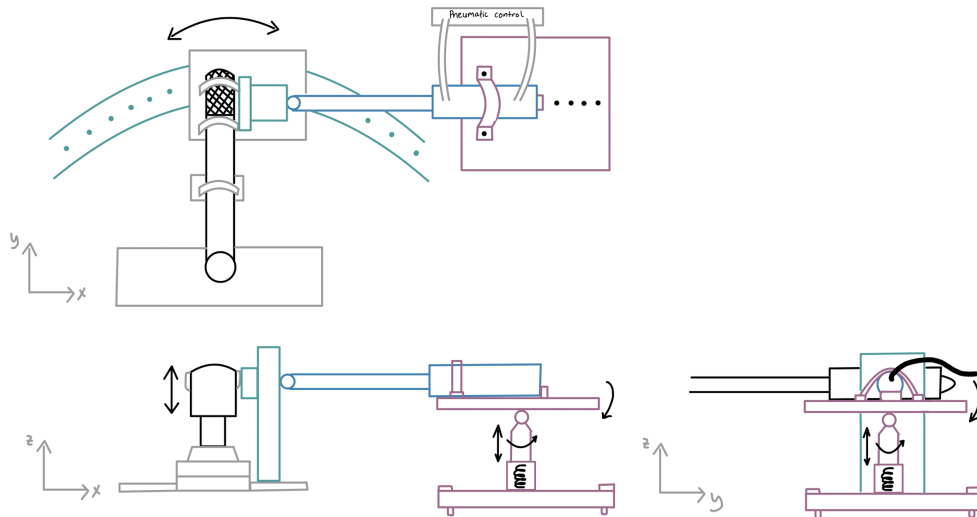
Design Concept 2: drawing with front view (xz-plane), side view (yz-plane) and top view (xy-plane).
